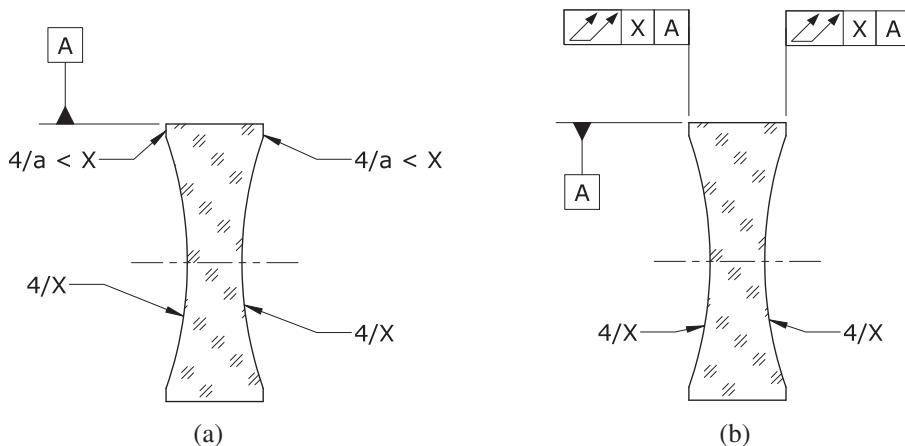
Centering tolerance on both optical surfaces and a nonoptical surface referenced to the cylindrical surface datum. The centering tolerance for both cases are explicitly defined but one is shown with (a) ISO 10110-6 notation and one is shown with the nonoptical surface using (b) ISO 1101 notation.
